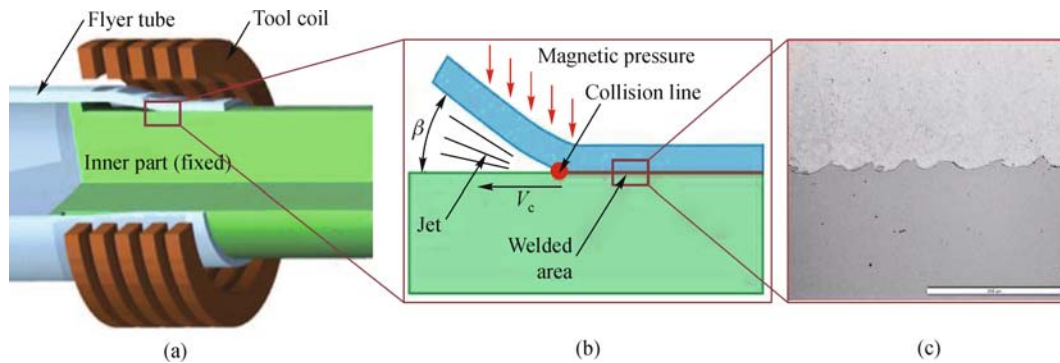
Magnetic pulse welding: (a) Welding set up; (b) collision and jet formation; (c) wavy interface pattern [28]
